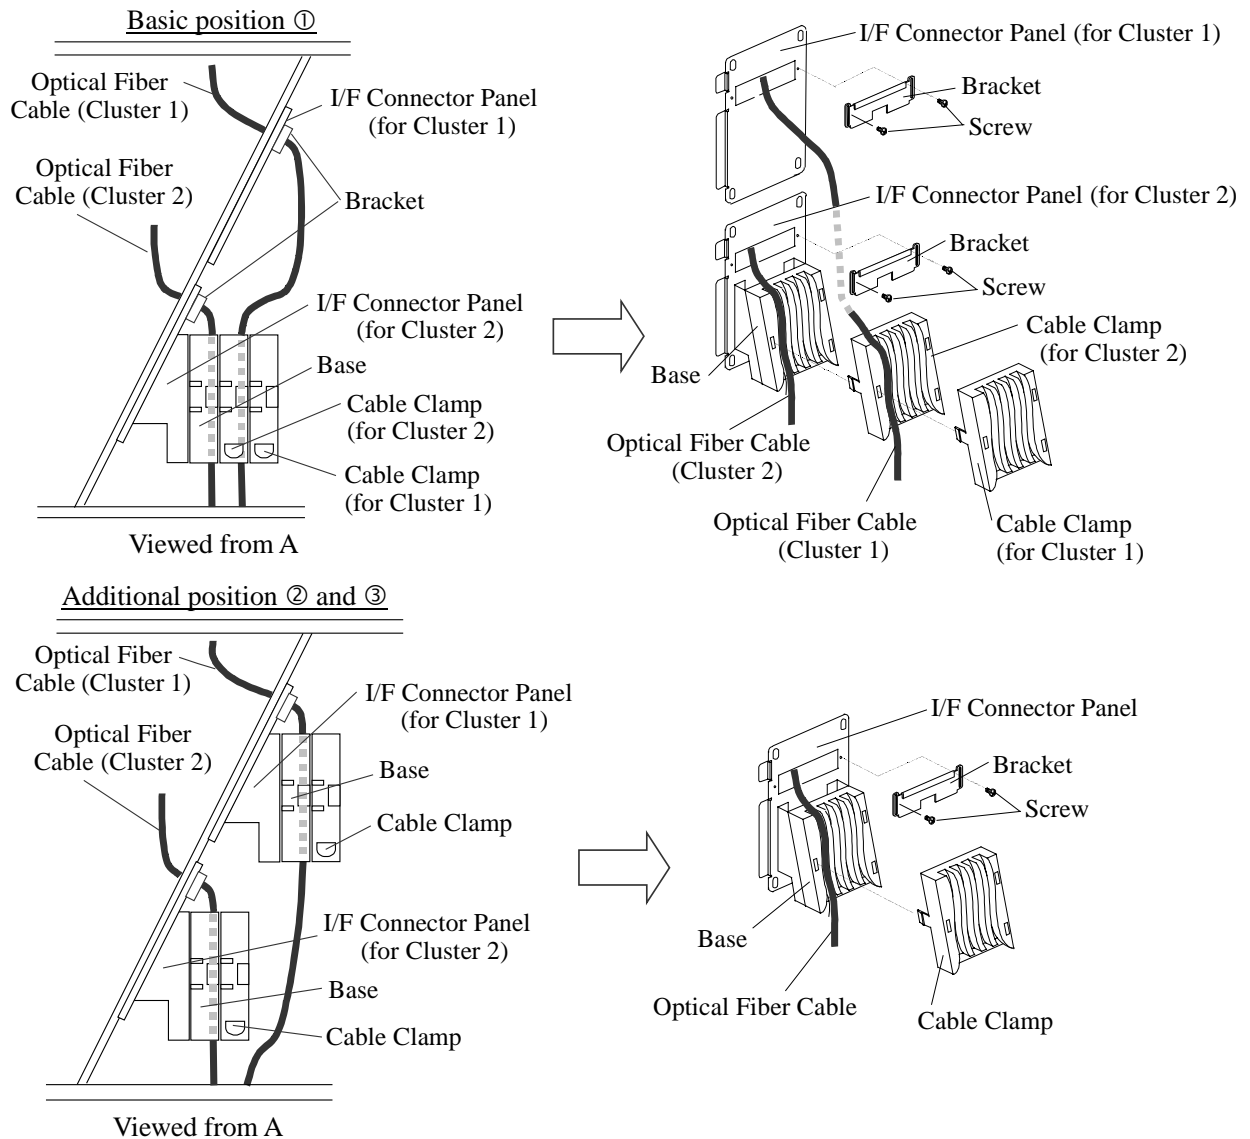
Installation of Optical Fiber Cable
